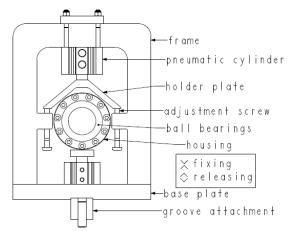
Dropping device used for supporting the shaft during acceleration and releasing it to backup bearings.
